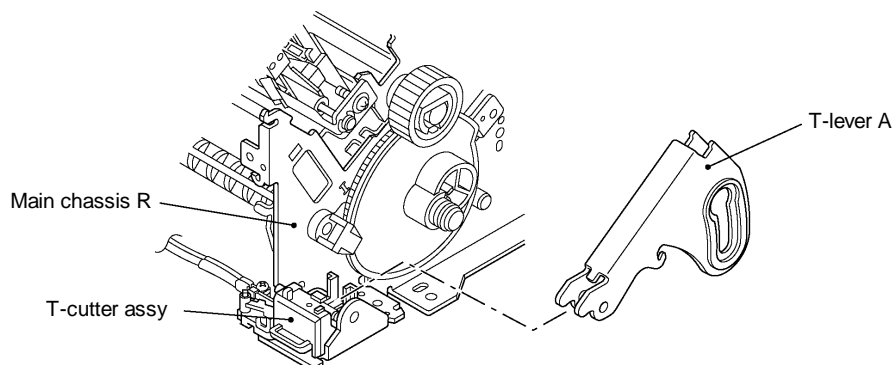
Installing the Right Side of the Chassis 2
